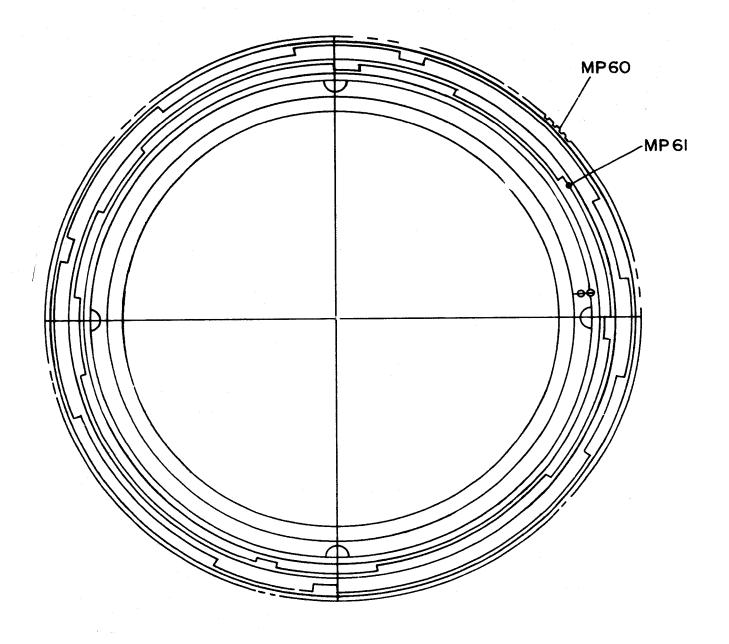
Turret Drive Gear Assembly (P/O A2A4), Component Locations
